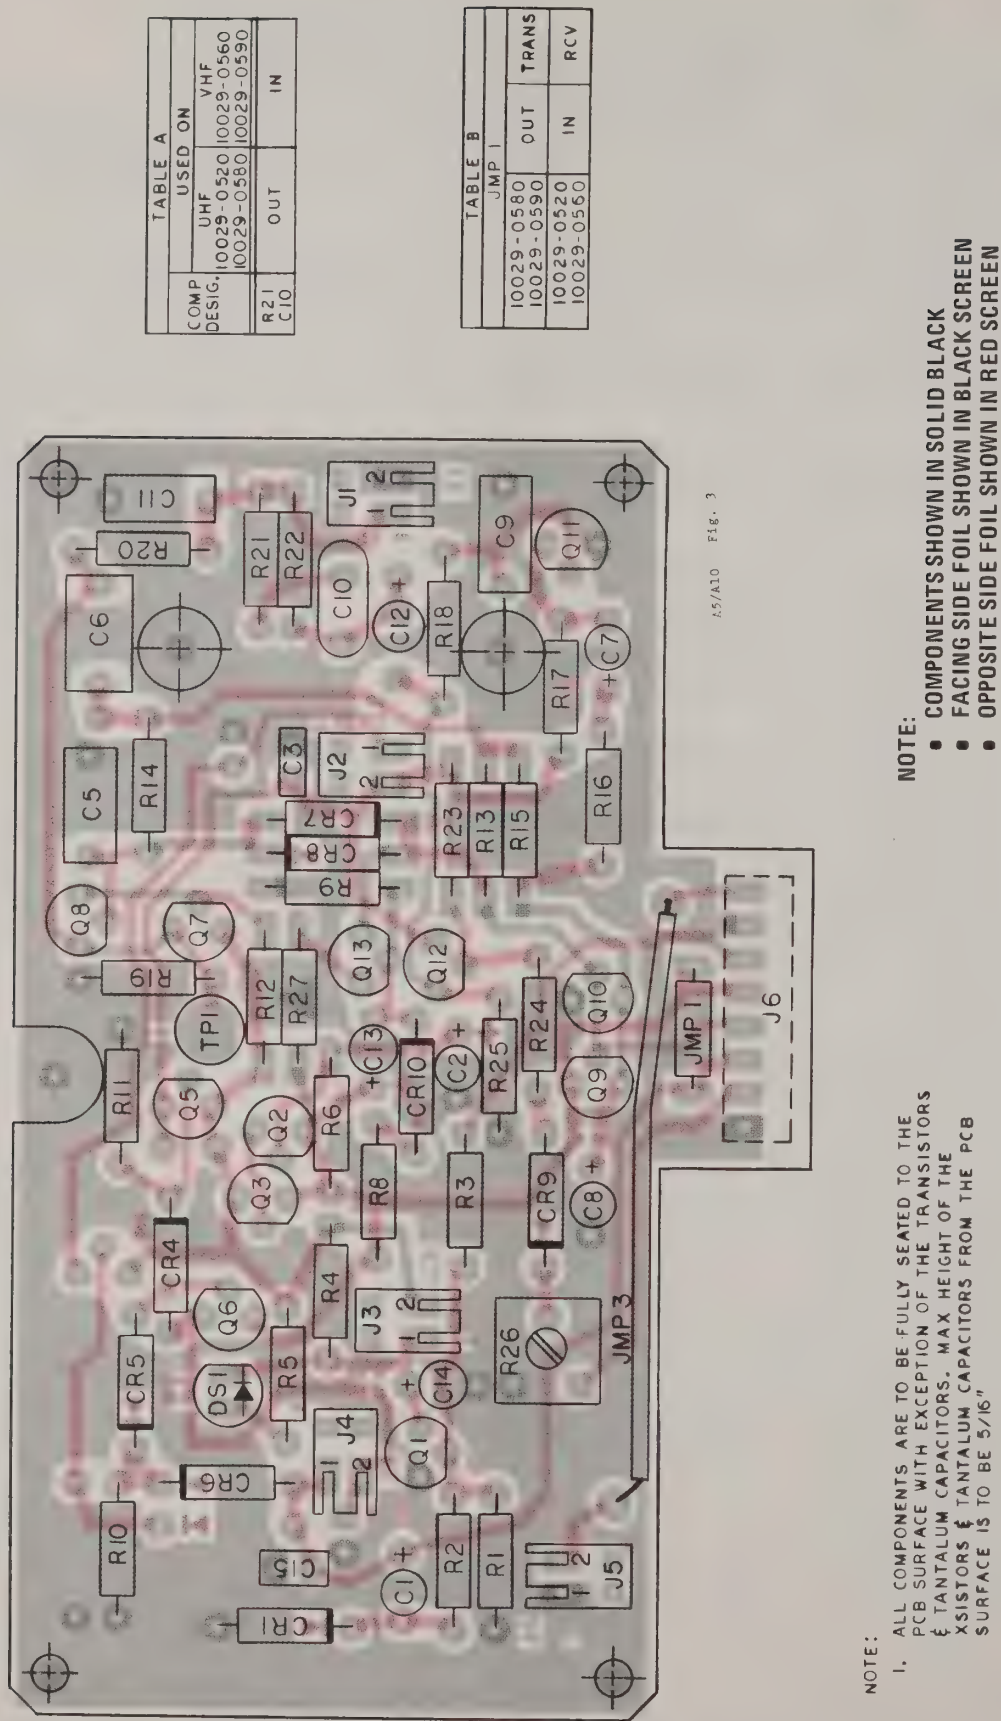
Loop Filter Board Assembly A5A2/A10A2, Component Location Diagram
